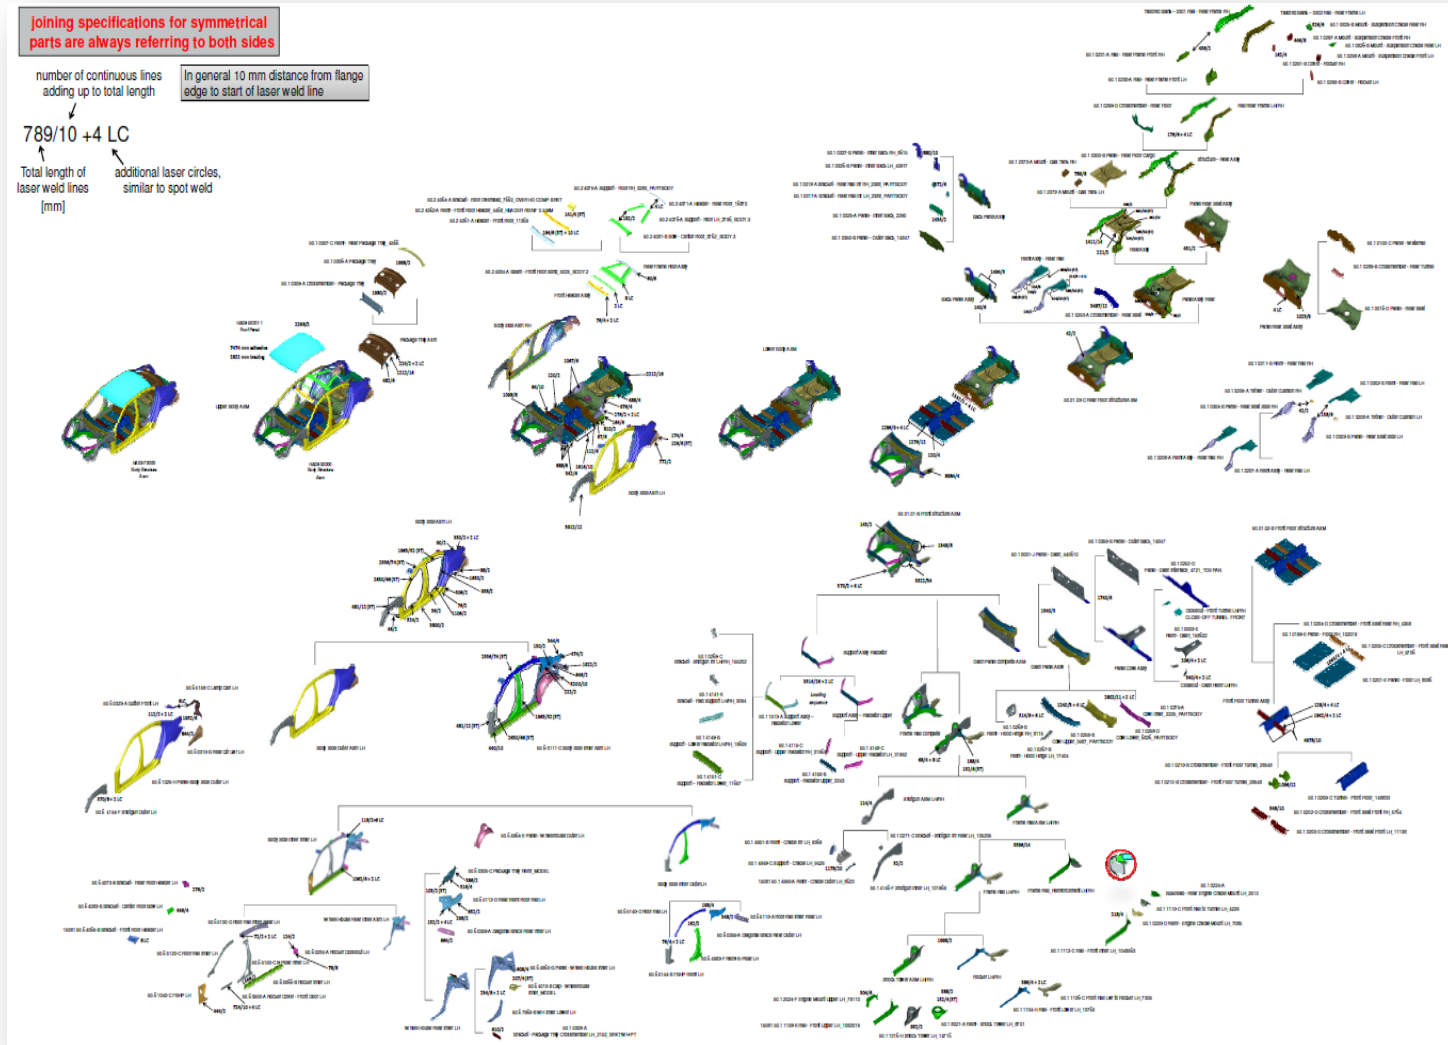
Assembly Tree – Laser Welded Structure
